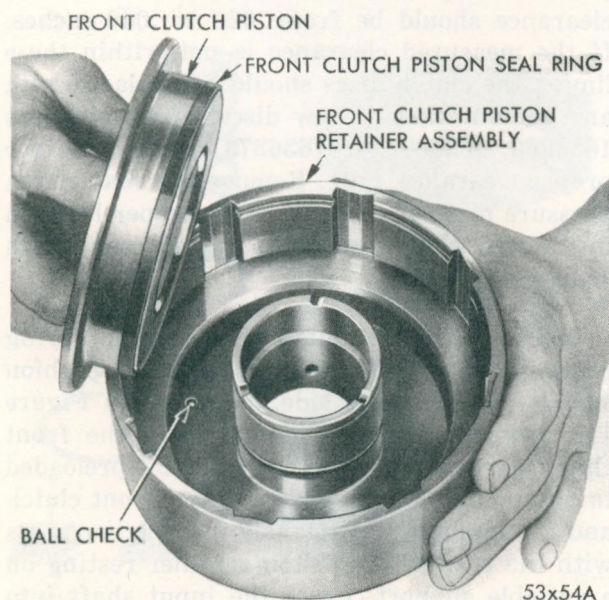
Removal and Installation of Front Clutch Piston Assembly
